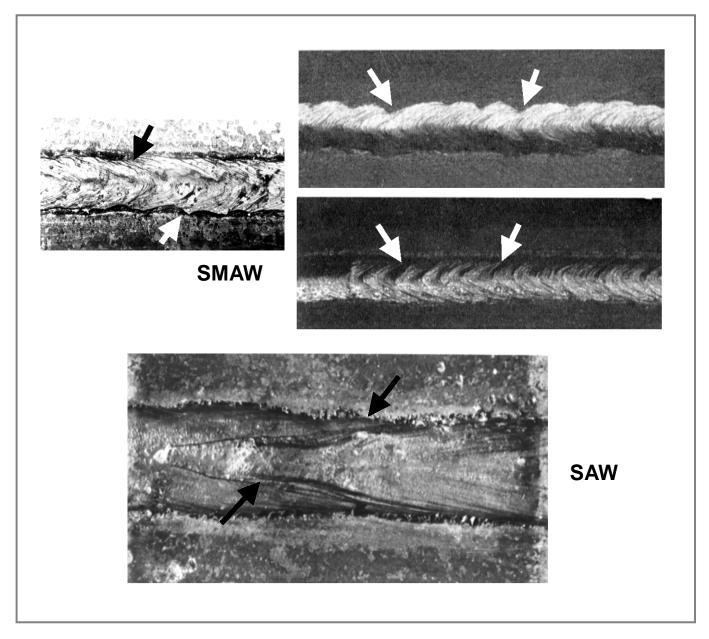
UNEVEN WELD BEAD RIPPLES
